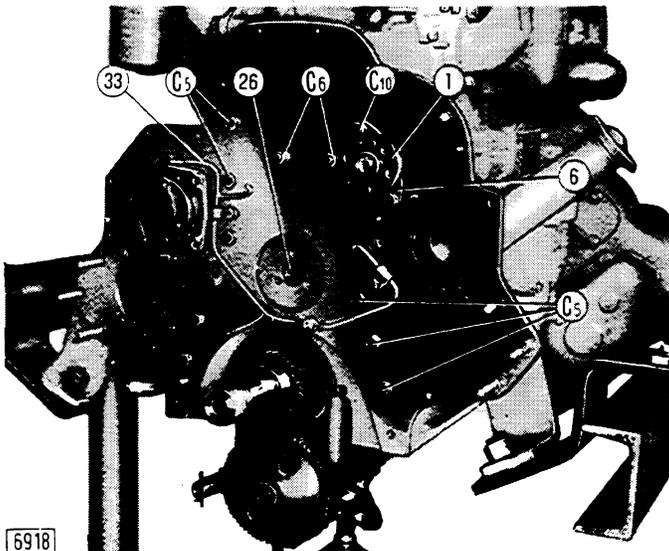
Scrap View of Engine Showing Camshaft Position
